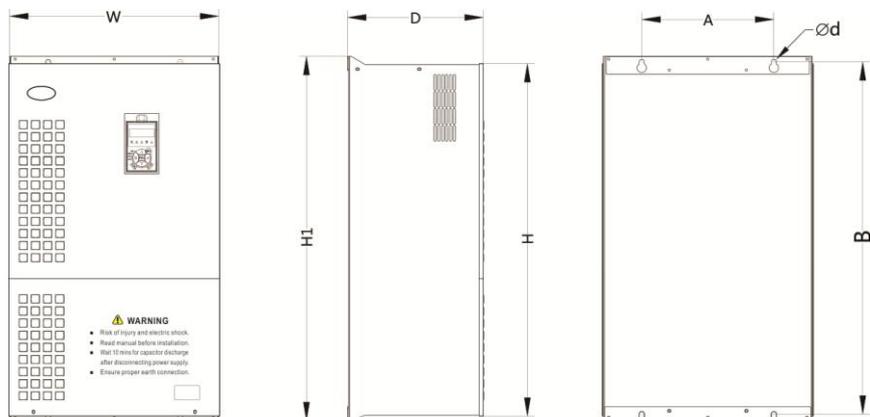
Product Outline, Mounting Dimension Schematic diagram
